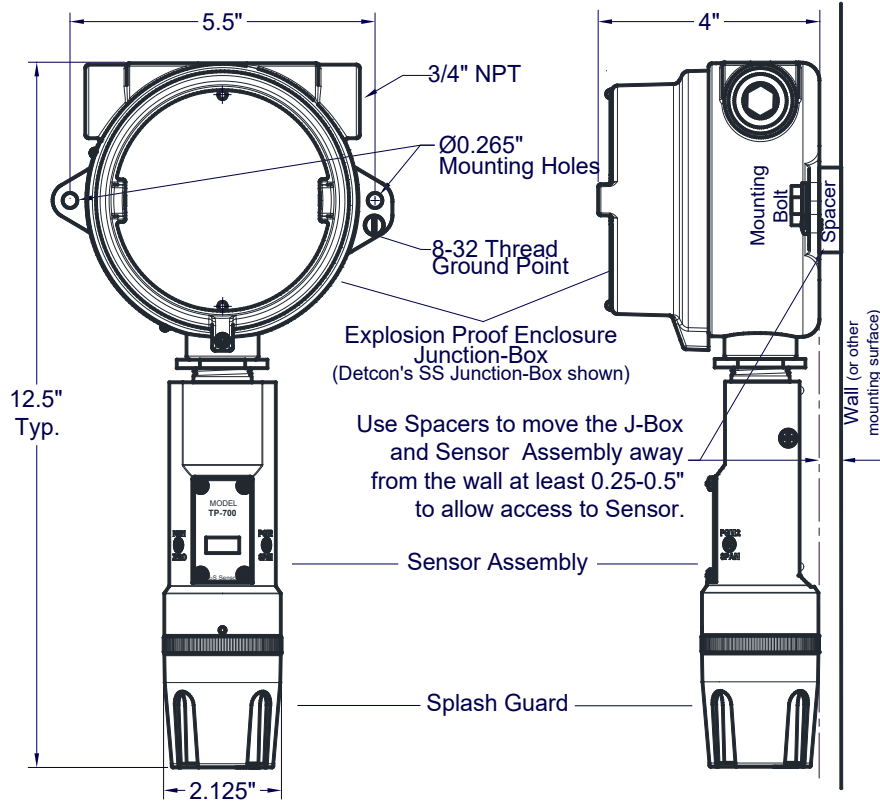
Outline and Mounting Dimensions (Stainless Steel Junction Box)
